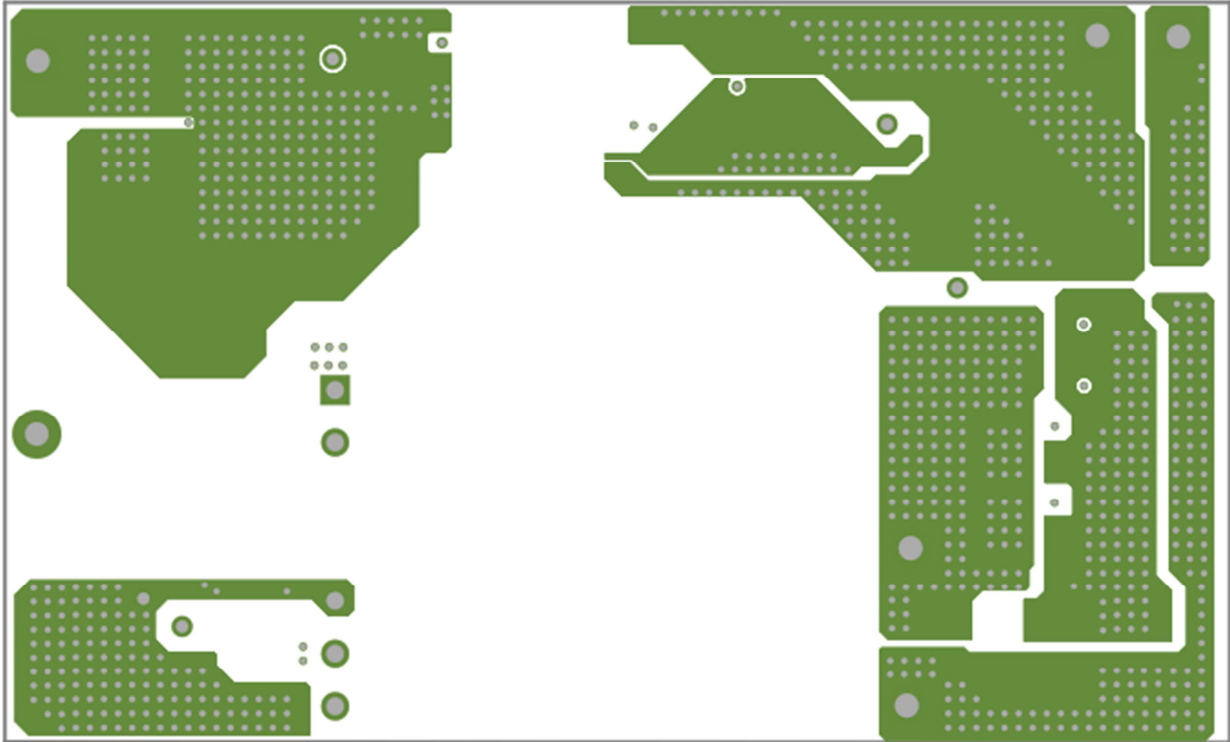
Printed Circuit Board Layout (Internal layer 2).
